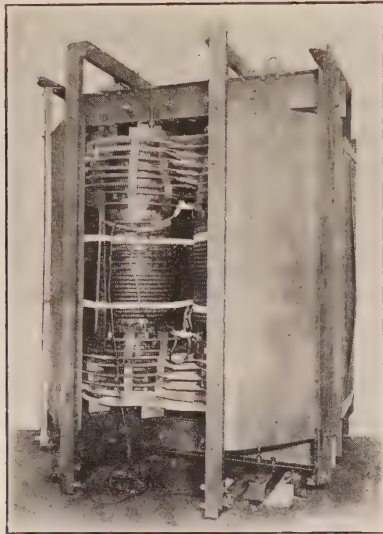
ASSEMBLY OF CORE, COILS, STATIC SHIELDS ENCLOSING CORE AND COILS, WITH INSULATION BARRIERS BETWEEN SHIELDS AND TANK
